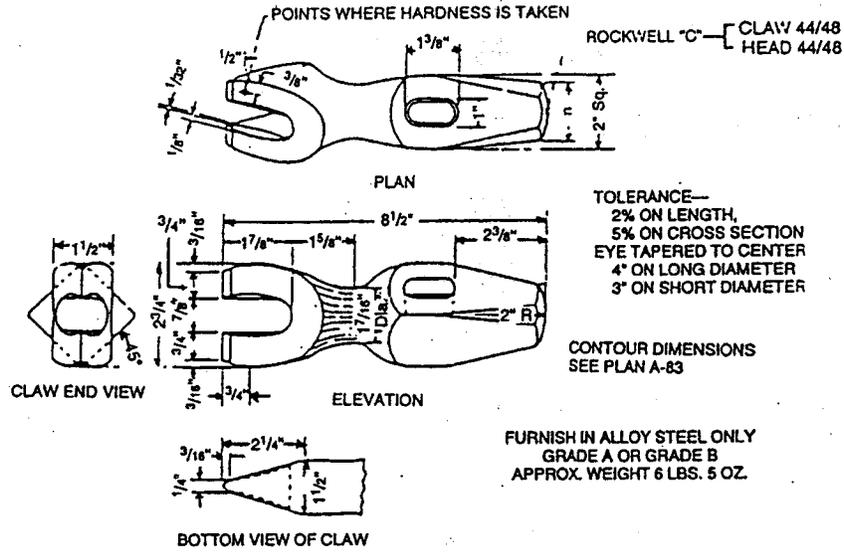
Plan 32-83 – AREMA Track Spike Lifter
